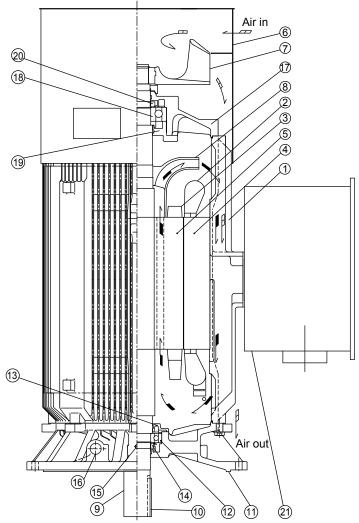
Section Drawing of Vertical flange mount (Frame size 315~450)
